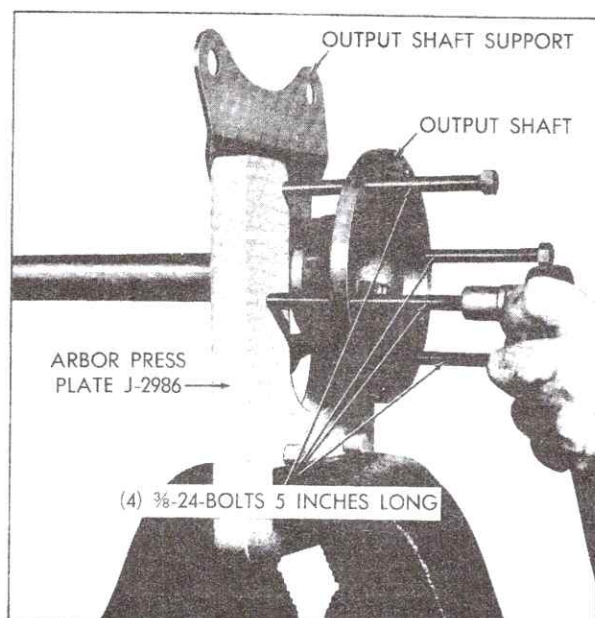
Removing Right Hand Output Shaft Support and Bearing
